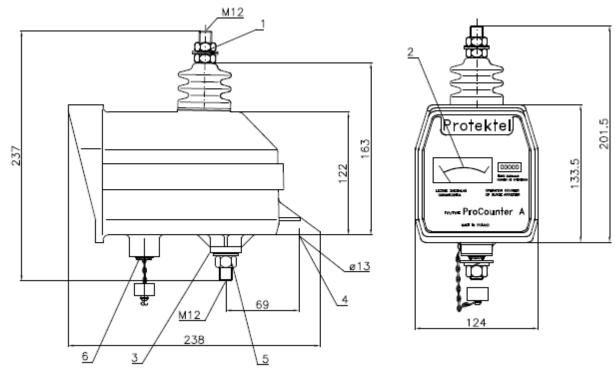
Dimensional drawning of surge counter ProCounter (A; B; C; D; E; module F1) with assembly notes
